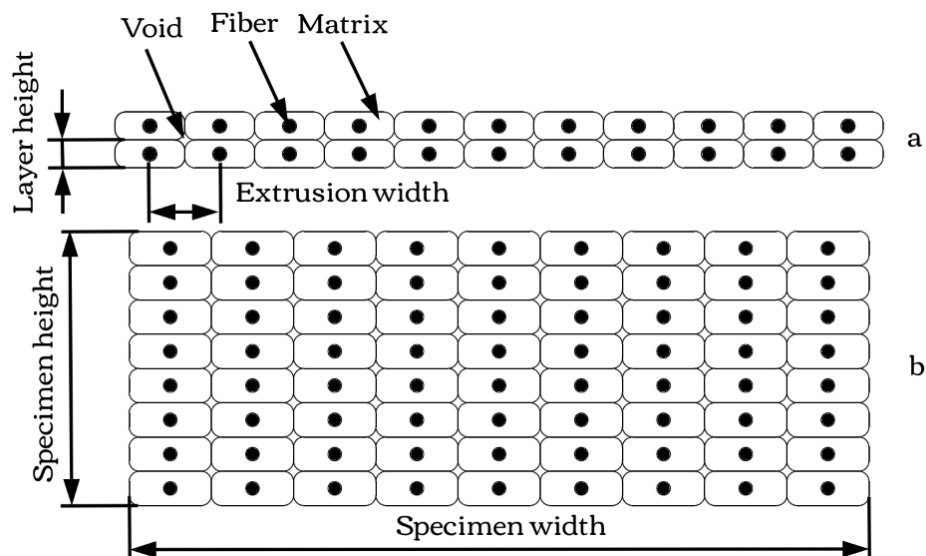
Cross-sectional view of composite specimens: a – tensile specimen, b – flexural specimen
